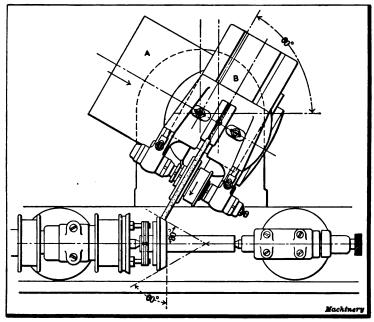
Grinding Abrupt Taper by Setting Wheel-slide to Required Angle
